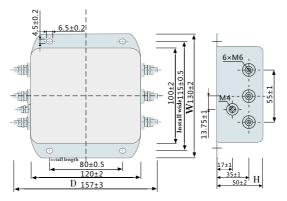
Simple Filter Outline and Installation Dimension Figure
